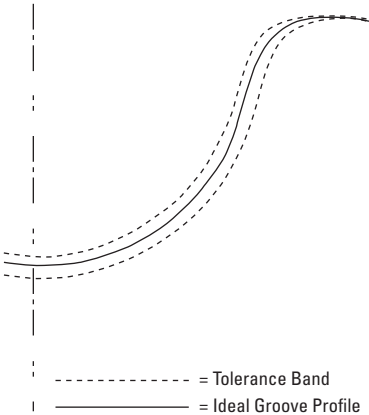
Typical Pulley Groove Tolerance Band
